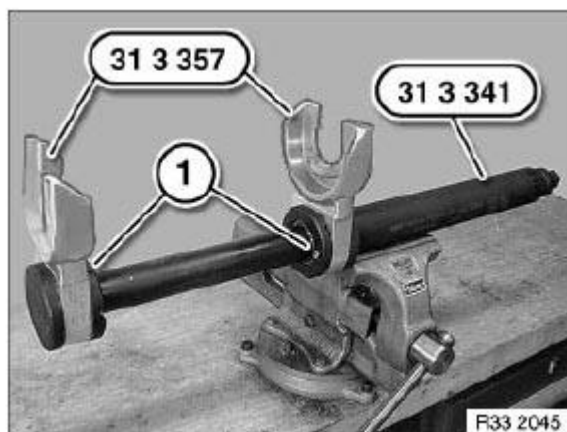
Clamping Special Tool (31 3 341) In Vice
